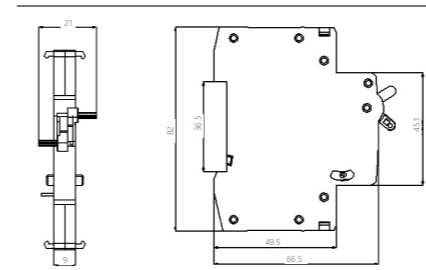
LMI-B1 mechanical interlock appearance and installation dimension
